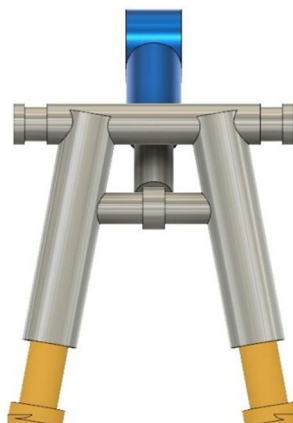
(b) Front View of automatic centre stand when first and other two Hydraulic Cylinder operated
